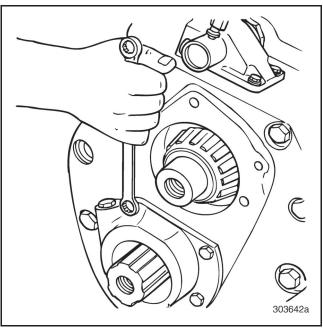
Removing Front-Driving Shaft Seal Housing Capscrews
